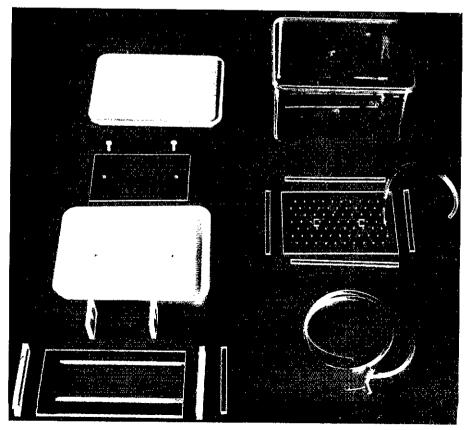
Individual parts of the bubble etcher prior to final assembly.
